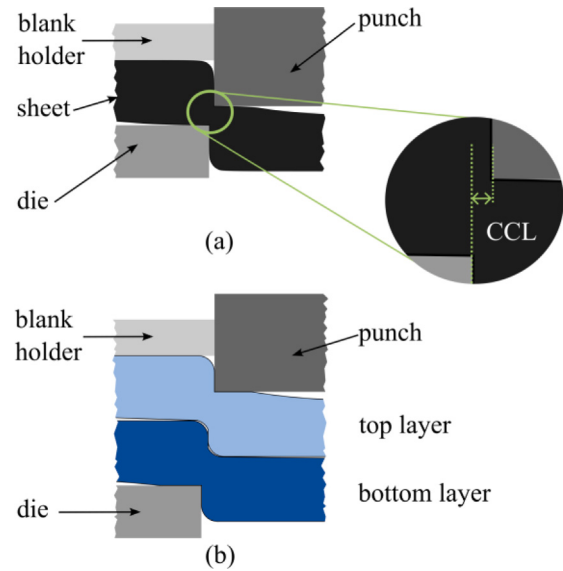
Experimental setup to manufacture shear-cut samples, (a) single-layer cutting, (b) multi-layer cutting.
